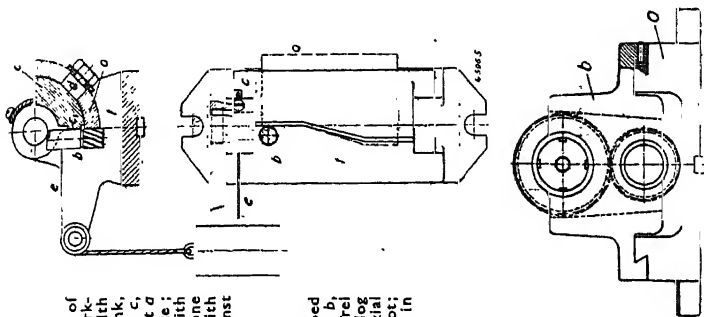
(Right).—Milling of cam segments: *a*, workpiece; *b*, end mill with accurately ground shank, serving as tracer pin; *c*, cradle to which segment *a* is fixed; *d*, templating pins, with nut and washer, only one shown; *e*, rope with weight presses *c* against *b*; *f*, body of fixture.
